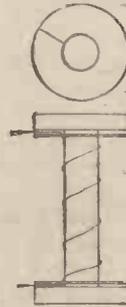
Method of Bringing Out Wire Between Paper Washers.
